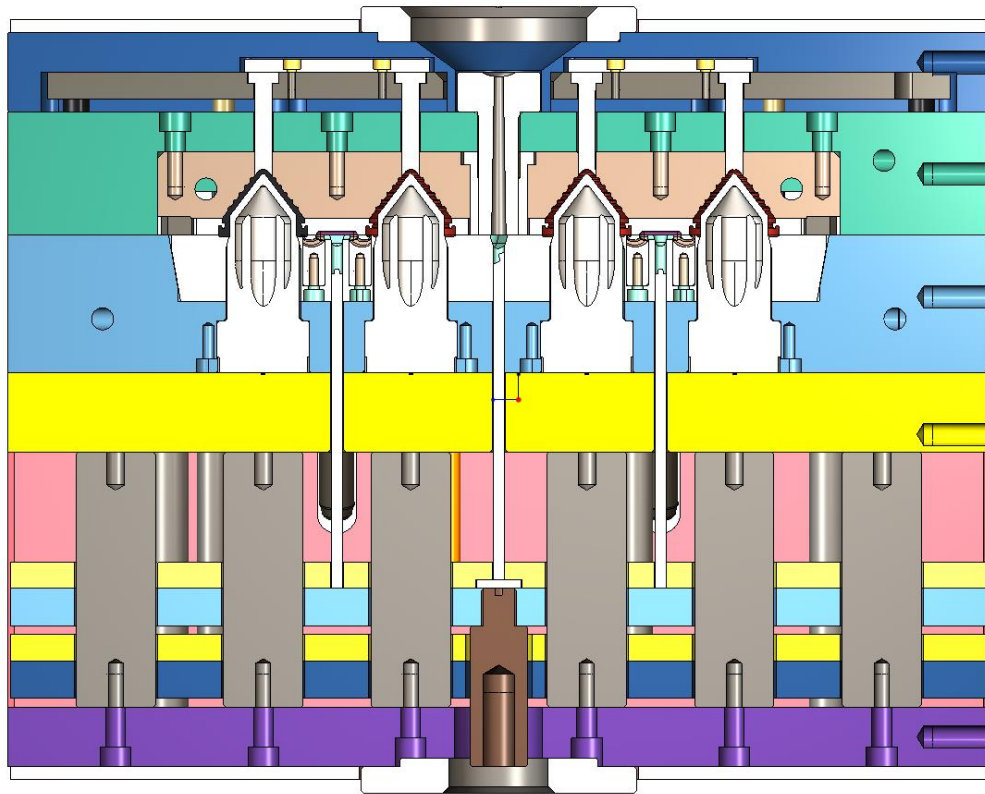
A cross section view of the tool assembly. Unlike presented in the picture, all inserts were unique in respect of water channel design.
